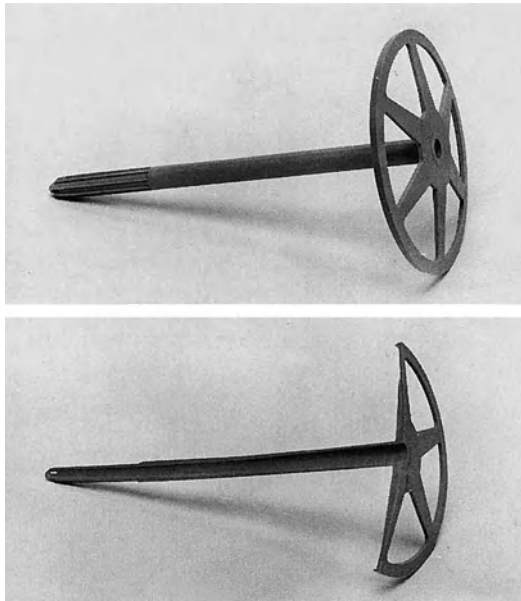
View of injection molded polypropylene retainers for insulating material, complete (top) and in section (bottom)
